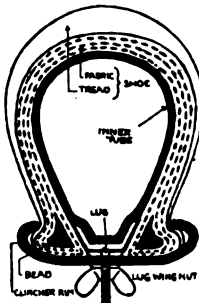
The old style double tube clincher bead tire on a one piece clincher rim. Note the lug formerly used to hold tire on the rim. Pneumatic tires were called "double tube" tires in the early days to distinguish them from the single tube tire, fig. 1.
